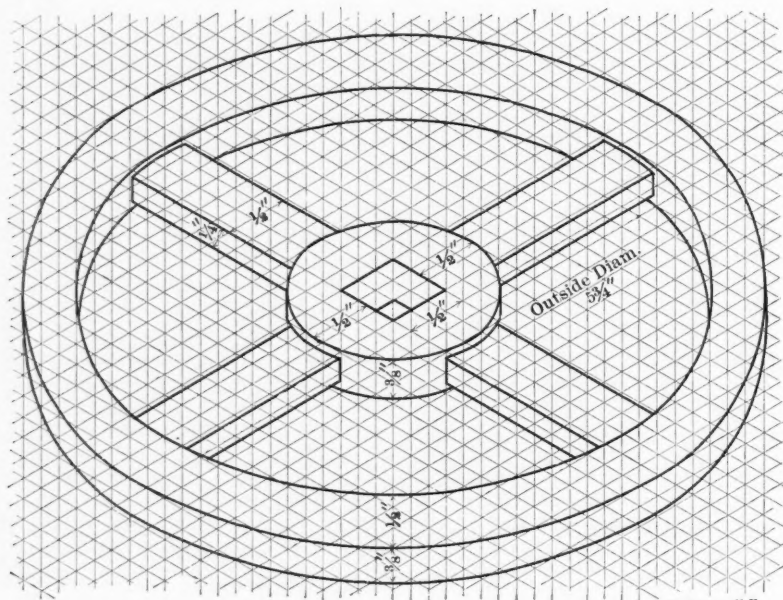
Spoked Wheel Drawn on Isometric Paper.
